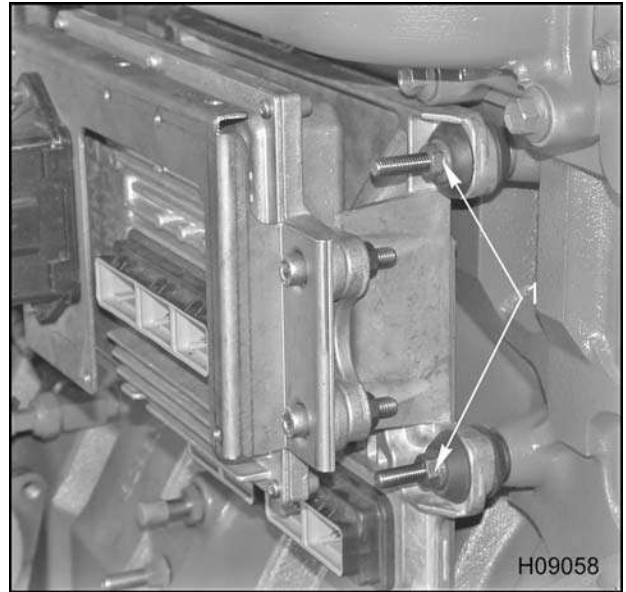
ECM, IDM, and EGR drive module assembly (side view)
